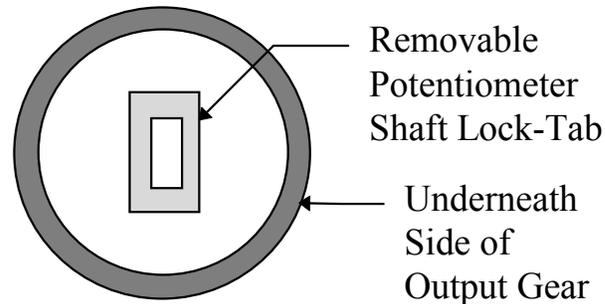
Illustration of the potentiometer shaft lock-tab inside the output gear.
